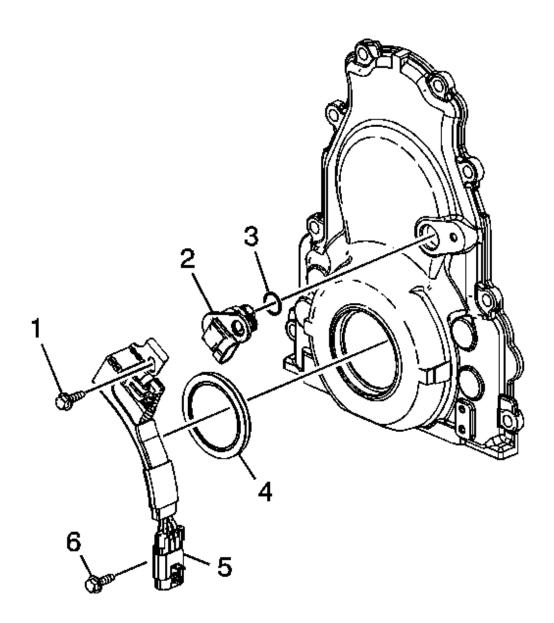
View Of Front Cover & Gasket Courtesy of GENERAL MOTORS CORP.
